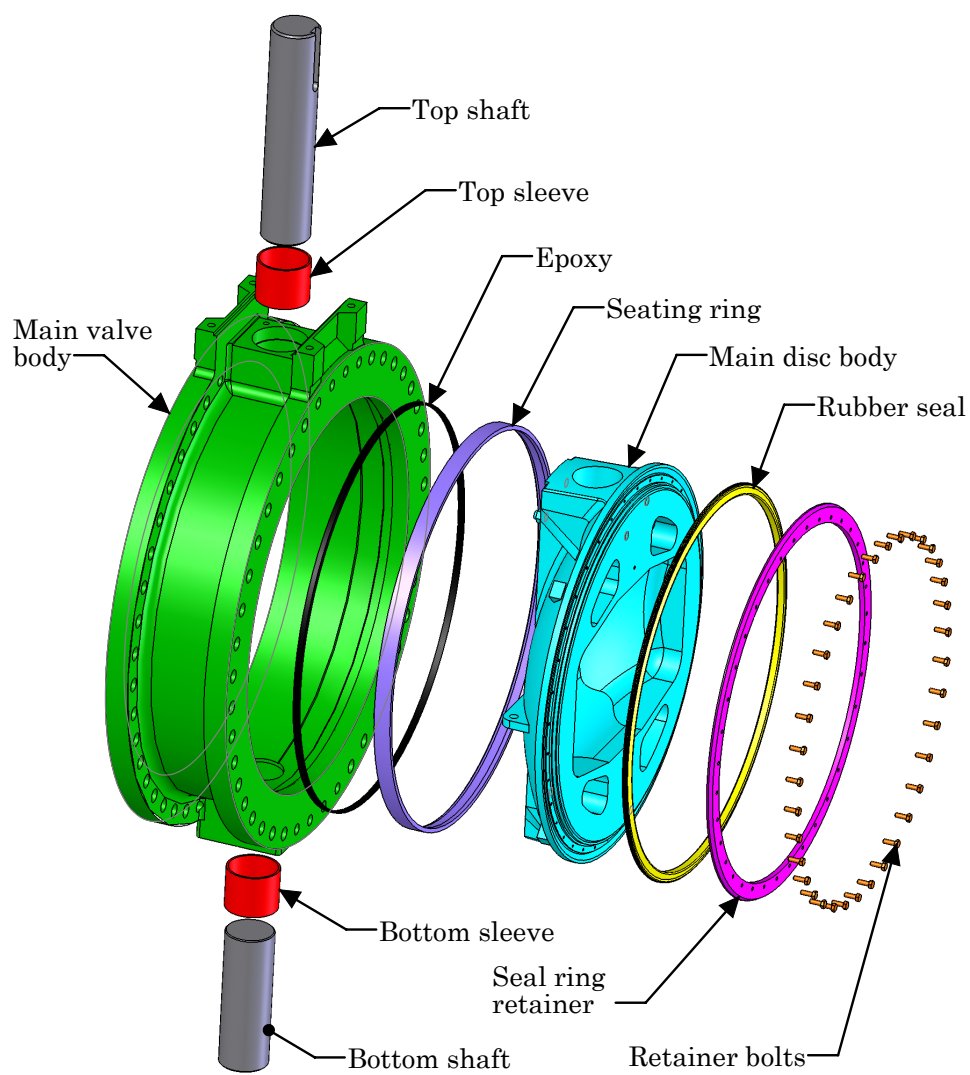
Exploded view of the components of a 48-inch butterfly valve.
